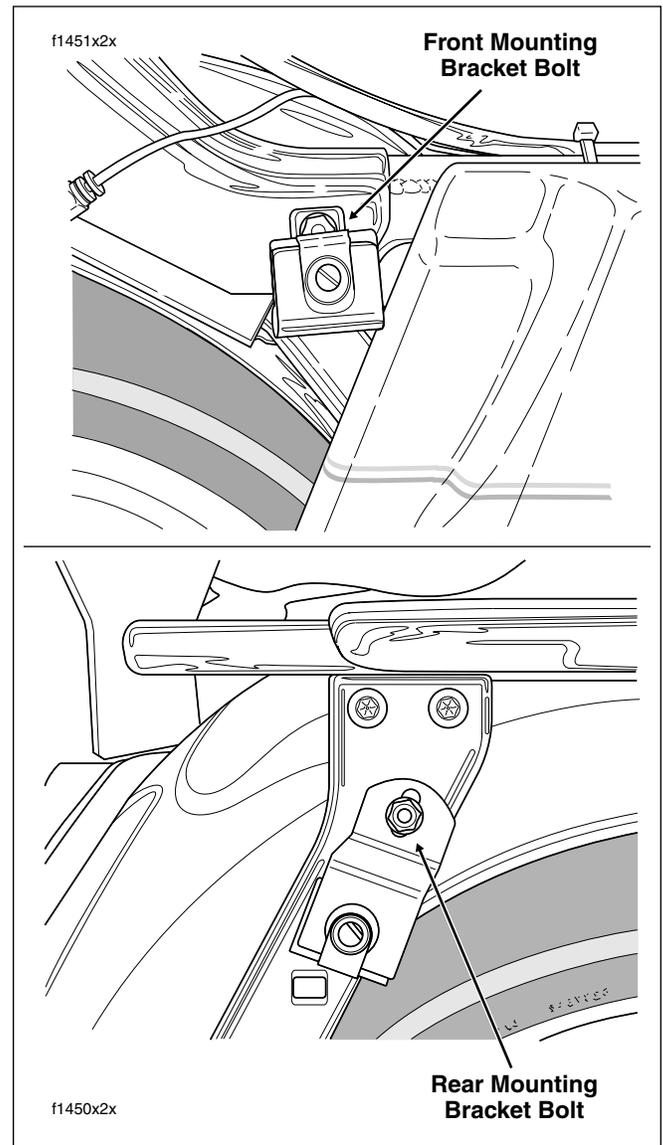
Saddlebag Mounting Bracket Bolts (Right Side View)
